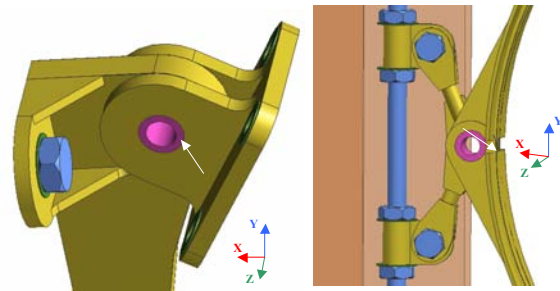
Details of suspension system: the front seating (left) is adjusted to engine geometry; the rear-clamping ring (right) can be regulated and shifted both in vertical and horizontal directions [10]
